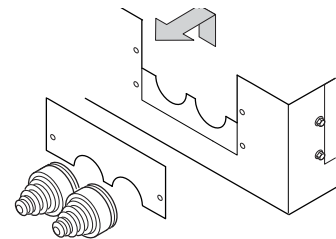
Removing the cable inlet with cable grommets (strain relief integrated)
